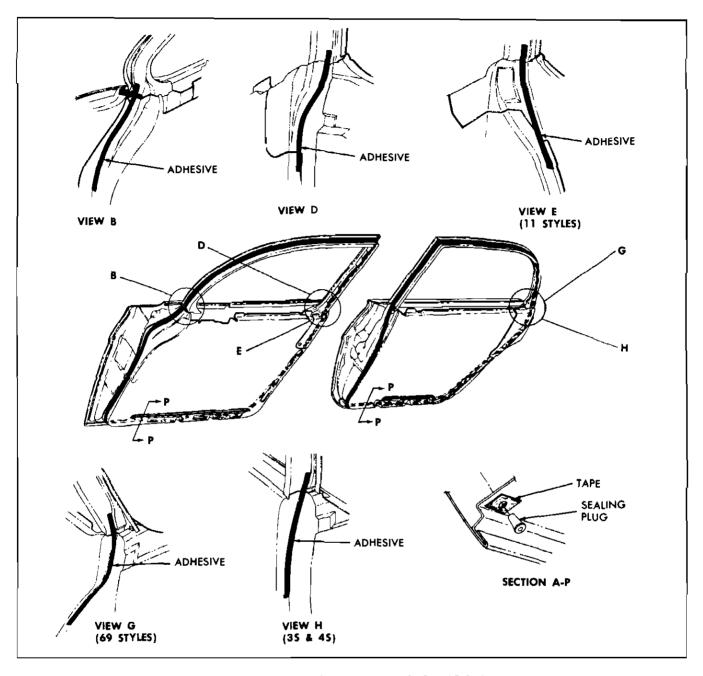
Door Weatherstrips-11, 69, 35, 45 Styles
